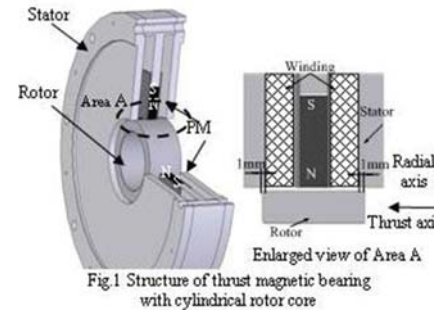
Structure of thrust magnetic bearing with cylindrical rotor core
